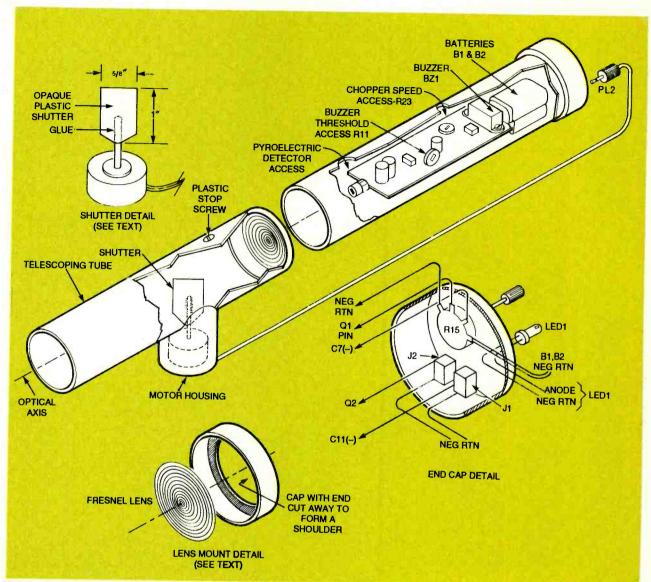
CUTAWAY VIEW OF THE INFRARED BODY HEAT DETECTOR with details for making the shutter, lens mount, and end-cap assemblies.
